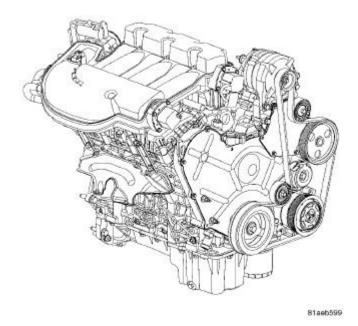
View Of 3.5L Engine Courtesy of CHRYSLER LLC
